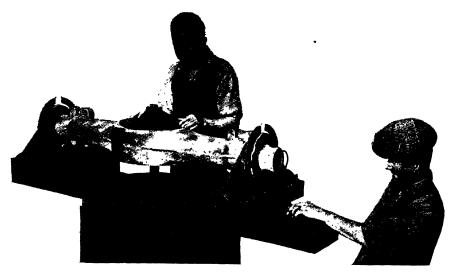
A special fixture developed for checking the various surfaces of a cast automobile rear-axle casing
